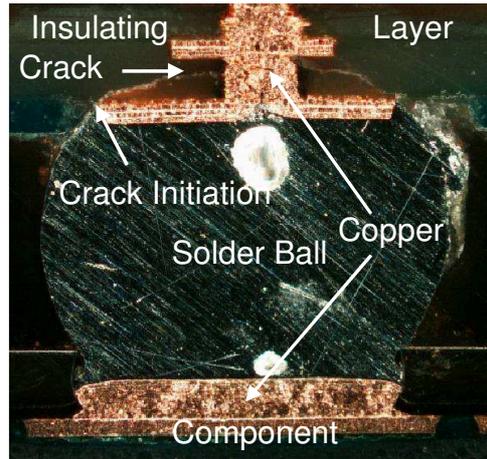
Light microscopy analysis of the cross section of a typical failure pattern of a PCB tested in a board level drop test.
